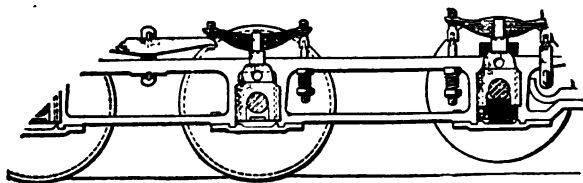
Blocking Broken Tire on Front Driver, Mogul Engine. Illustrating Question 82.
